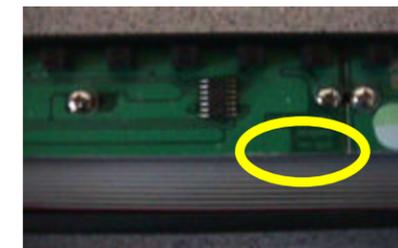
Attach ribbon cables paying close attention to the orientation. The cables are keyed but it is still easy to mix it
